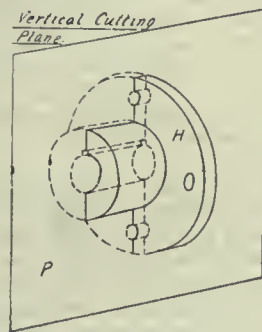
SHOWING CUTTING PLANE FOR HALF SECTION.
